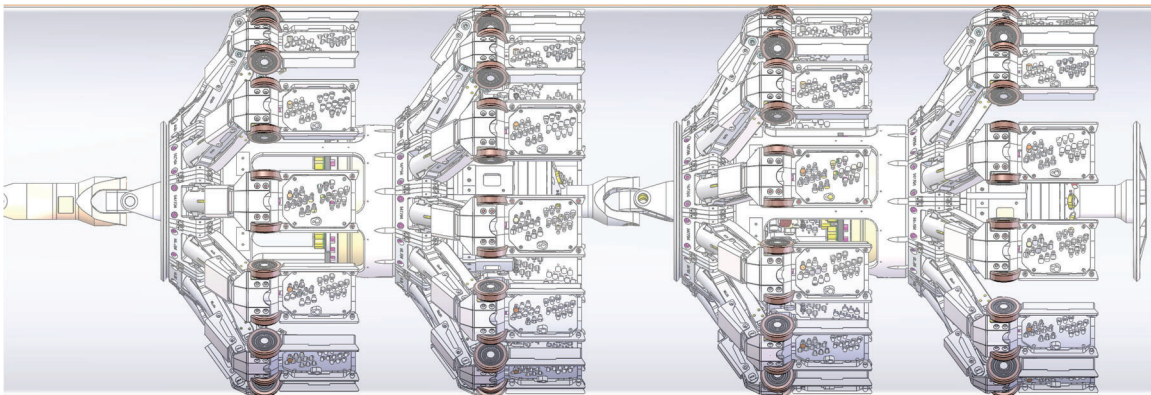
Schematic of the 36" sensor carrier design inside a pipeline
